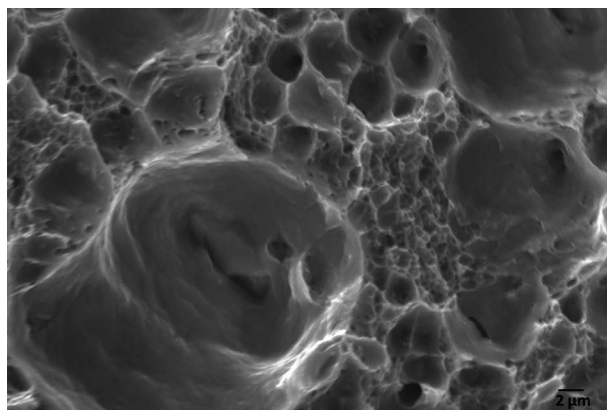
High magnified image of the fracture surface shown in Fig. 210
